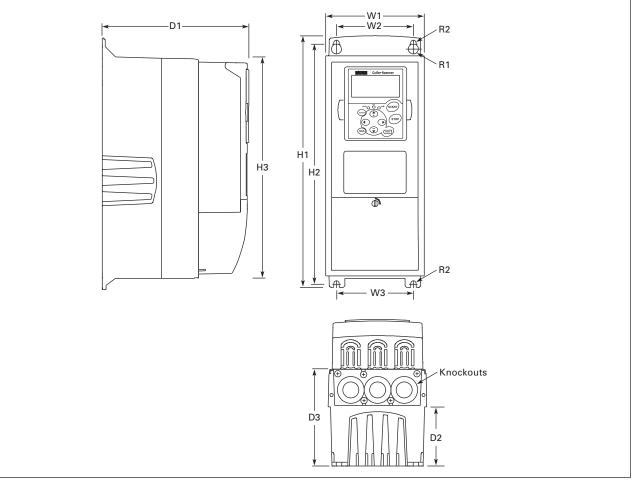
NEMA Type 1 and NEMA Type 12 9000X Drive Dimensions, FR4, FR5 and FR6
